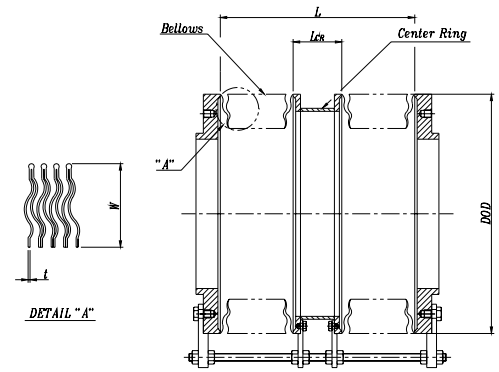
Basic shape of the welded bellows for KSTAR vacuum vessel
